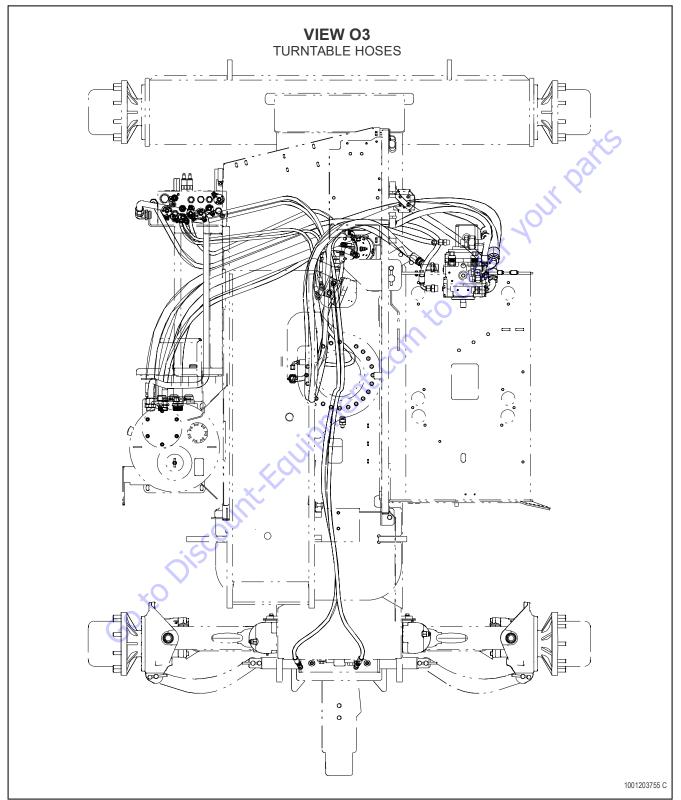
Hydraulics Installation - Sheet 18 of 28
